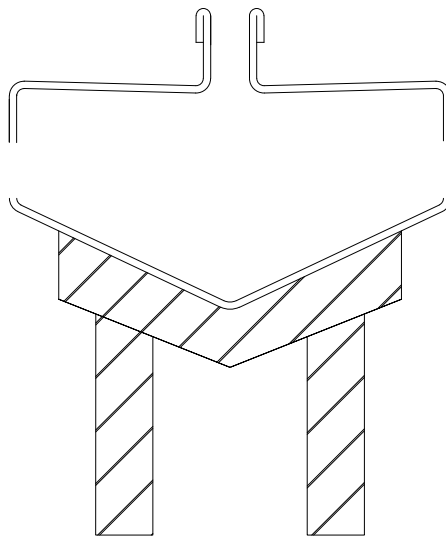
Welding of parts into unit (Source: Own illustration)
